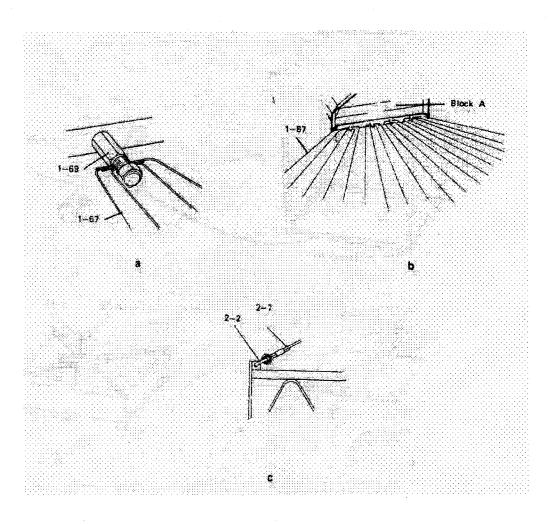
Earth Wires / Preparing the First Mast Section
